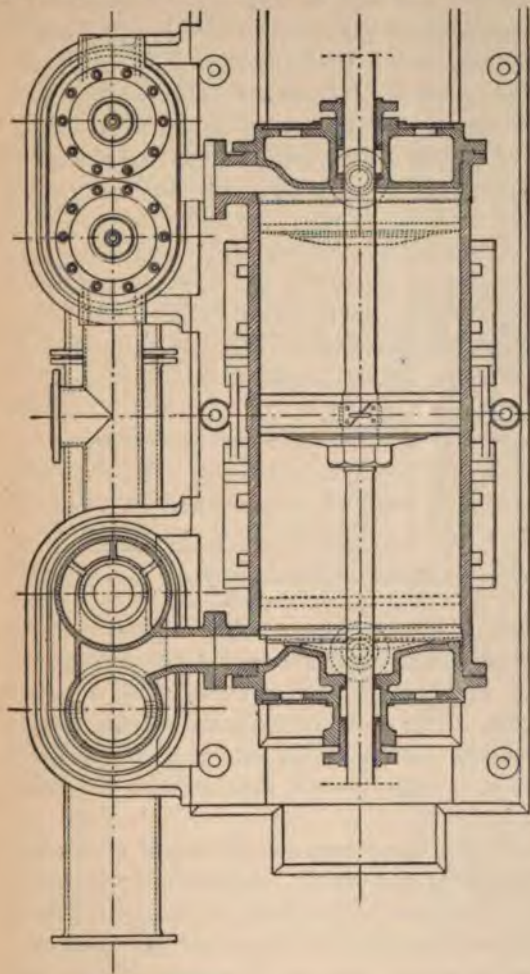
Daglish's Winding Engine: Cylinder and Valve-boxes; Horizontal Section. Scale 1/40th.
